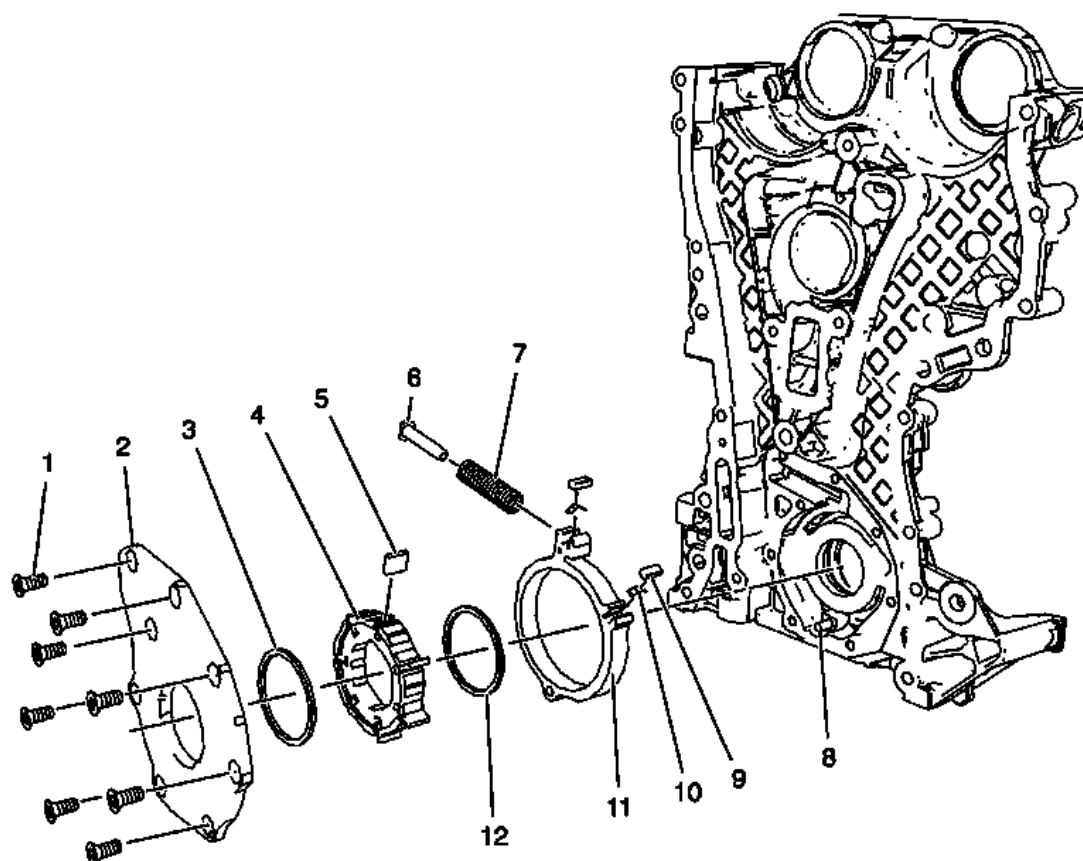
Engine Front Cover And Oil Pump Assembly Components (2 Of 2)
